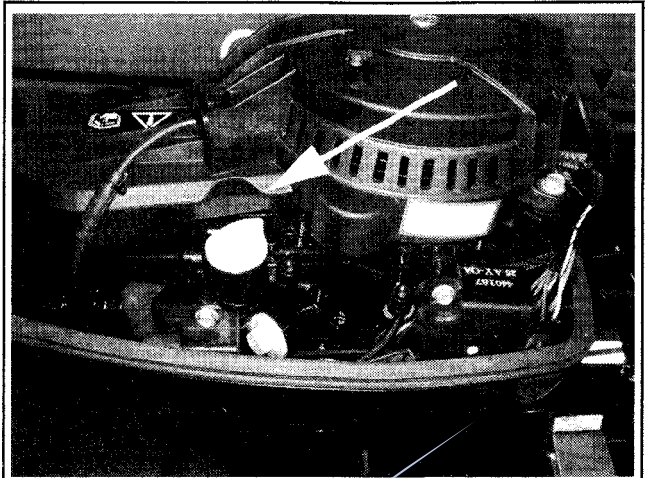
Although the timing belt is partially visible on most 4-strokes, thorough inspection requires cover removal
